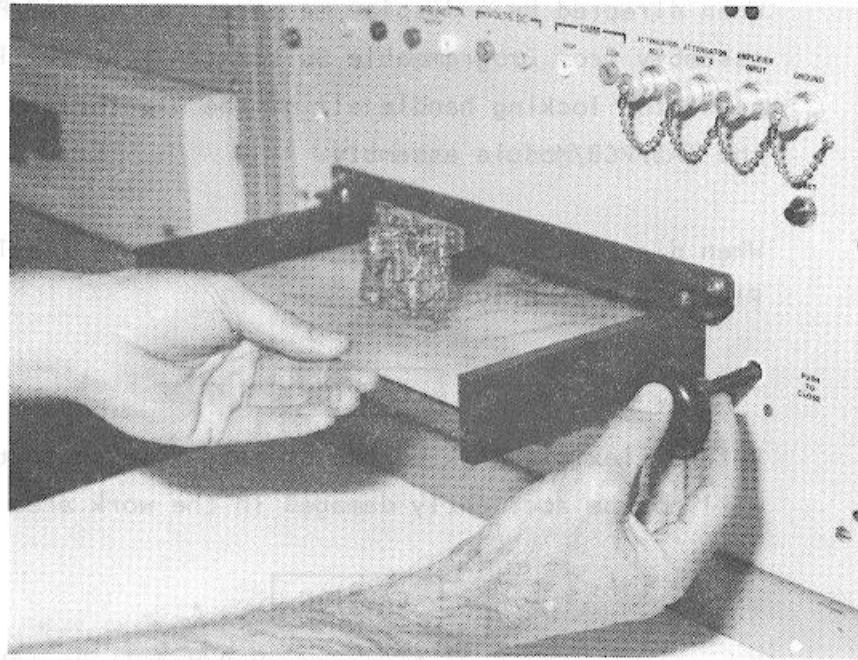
Inserting the IAB/PCB/Module in ZIF Connector
